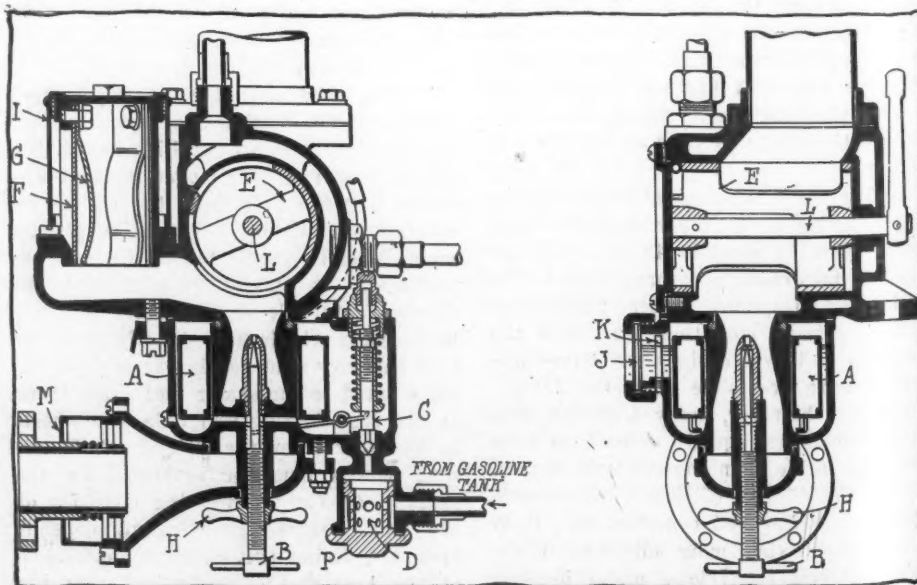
SECTIONAL VIEW OF PIERCE-ARROW CARBURETER
